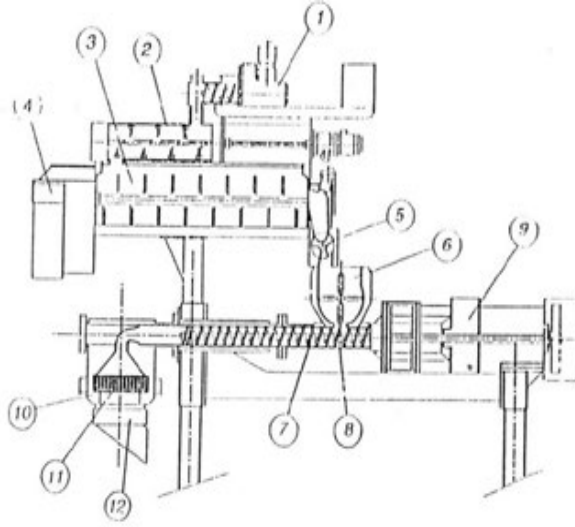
Layout of a modern continuous press. 1) Doser; 2) Pre-mixer; 3) Mixer; 4) Control gear box for mixers; 5) Capsulism device; 6) Vacuum mixer; 7) Extrusion worm; 8) Cylinder; 9) Worm control gear box; 10) Extrusion Head; 11) Die; 12) Cutter.
